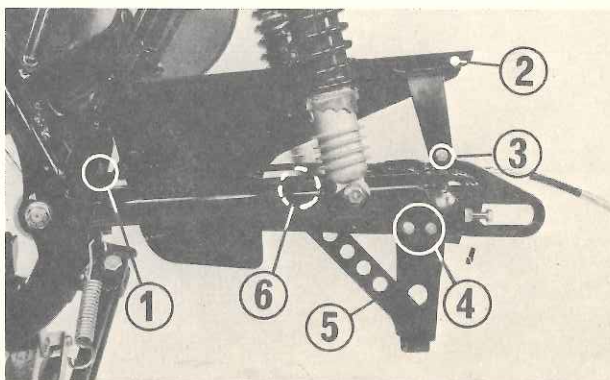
(1) 6x55 mm flanged bolt (2) Chain case (3) 6x12 mm bolt (4) 6x12 mm bolts (5) Chain guide (6) Rear fork assembly
